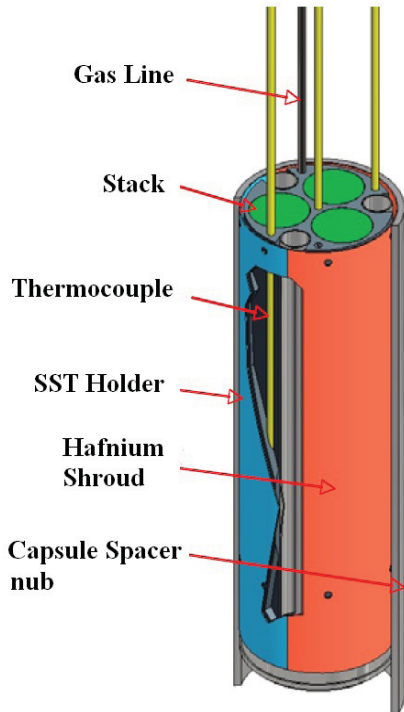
Three-dimensional cutaway rendering of single AGR-1 capsule.
